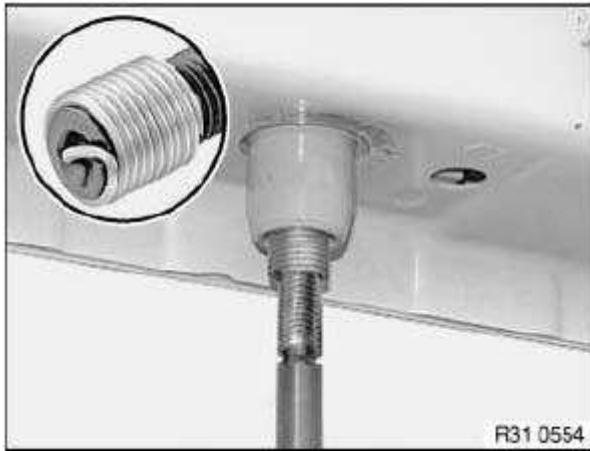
Screwing Helicoil Thread Insert Into Locating Thread
